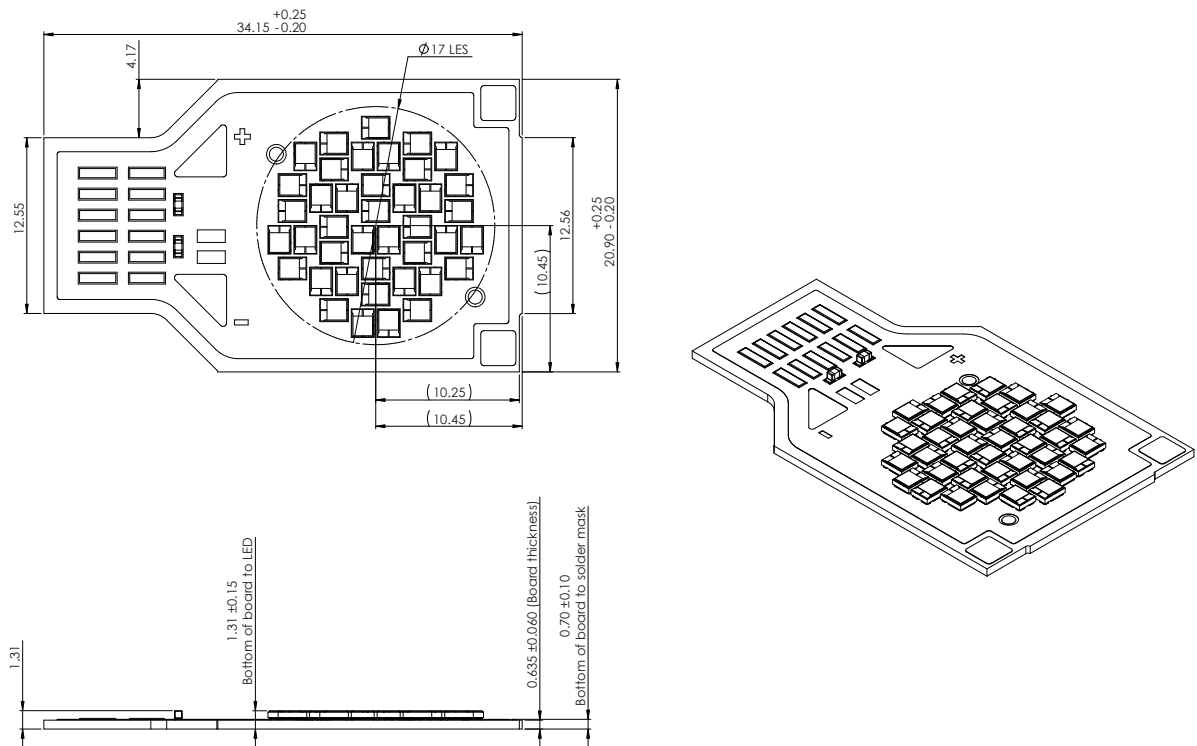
Package outline drawing for LUXEON S5000 / LXSx-Pxxx-004IN (Connector-less).
